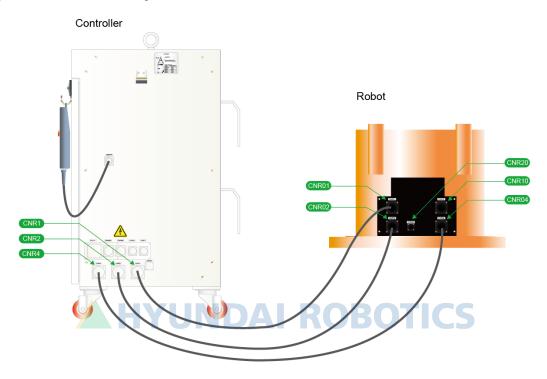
Connection of Robot Manipulator and Controller(Hi4a-0000, Hi4a-P000)
